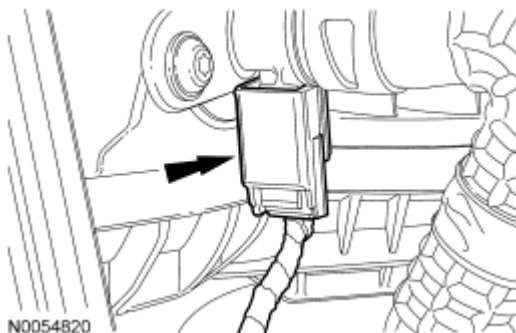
Identifying Positive Crankcase Ventilation (PCV) Fitting Electrical Connector
